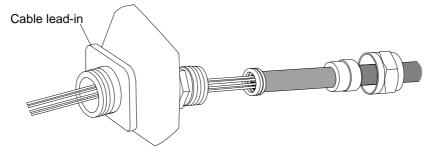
Tightening the forward half of the cable bushing to the cable lead-in.
